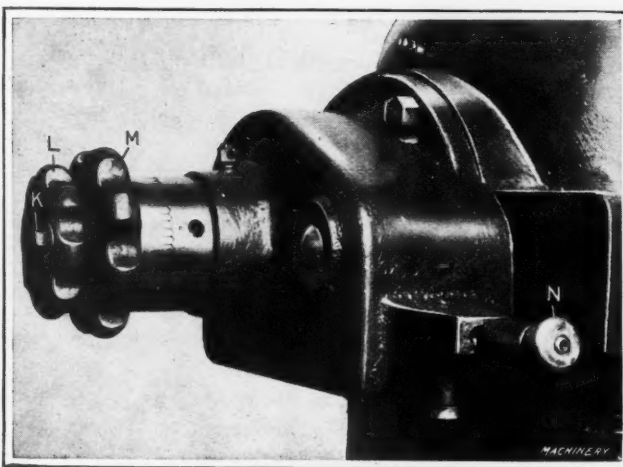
Knobs at End of Crankshaft which control the Crank Stroke
